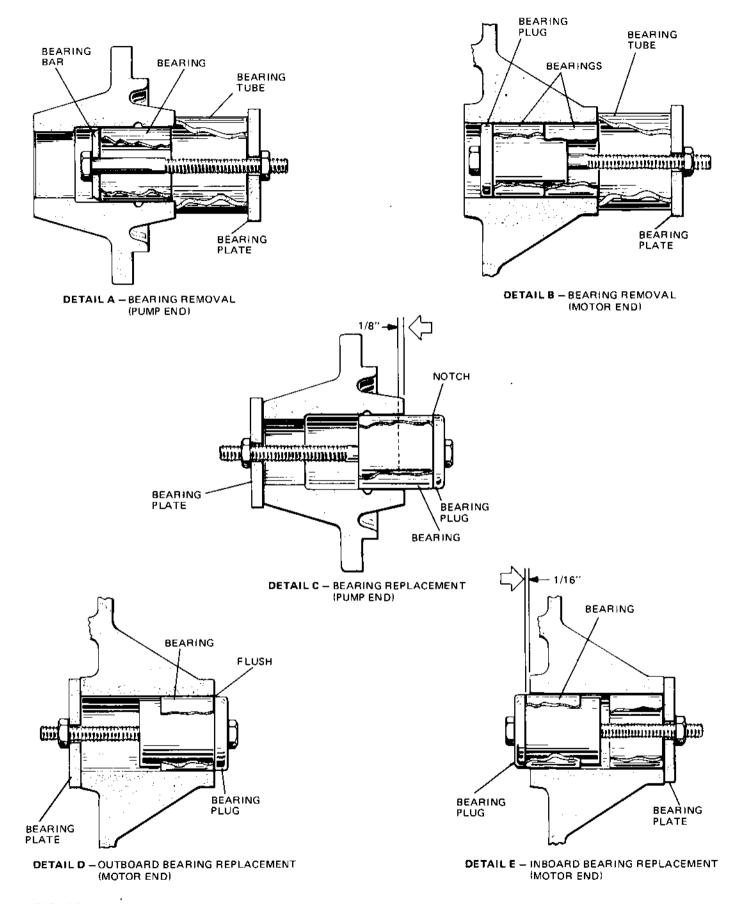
BEARING REMOVAL AND REPLACEMENT
